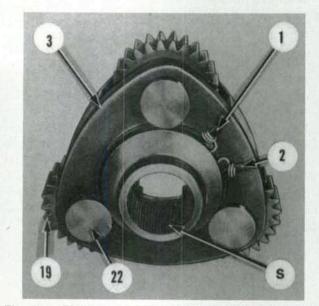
Planet gear shafts (22) are retained in carrier (3) by retainer ring (2).
